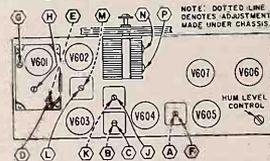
Top View of Tuner Chassis. Tube locations and alignment points shown.
